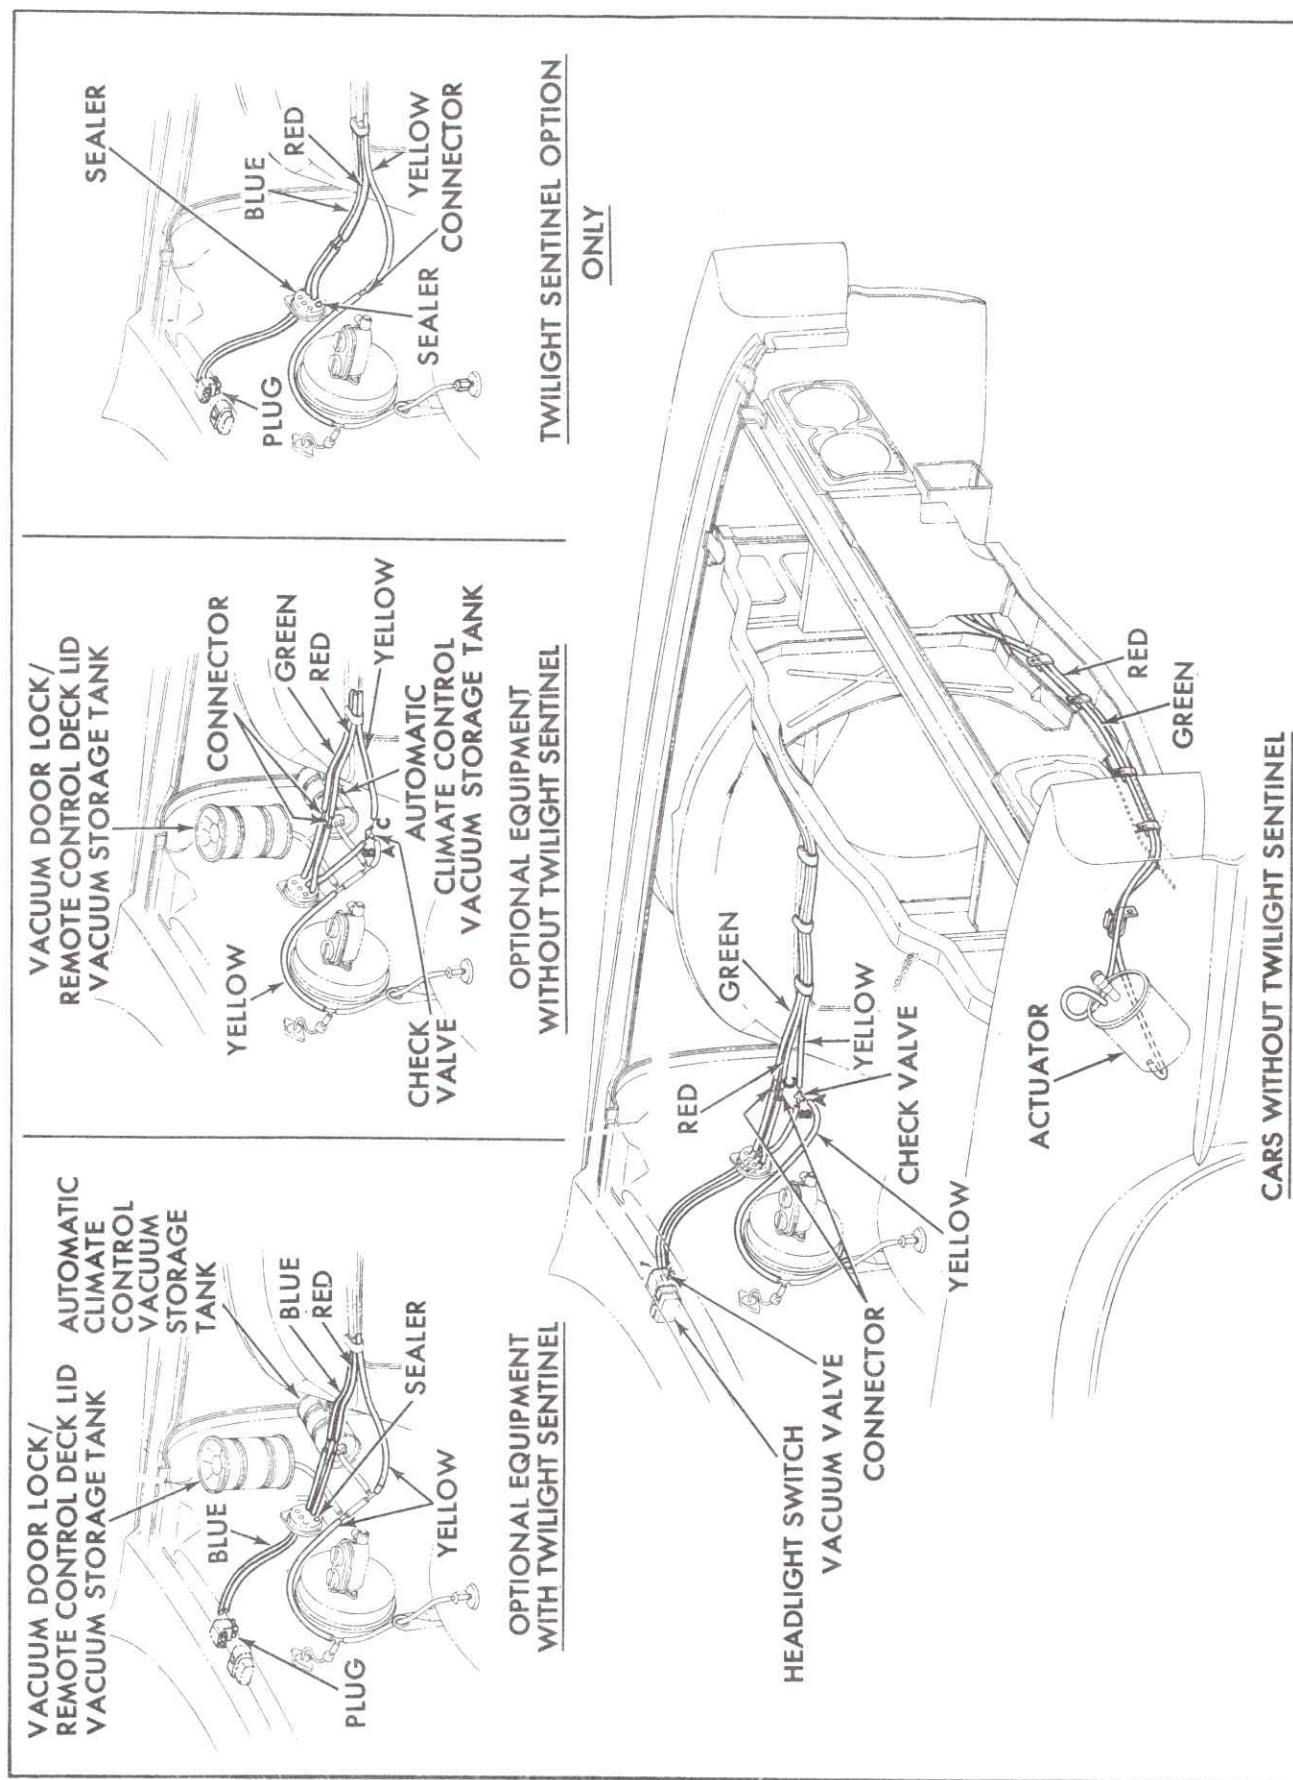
Headlamp Doors - Vacuum Schematic
